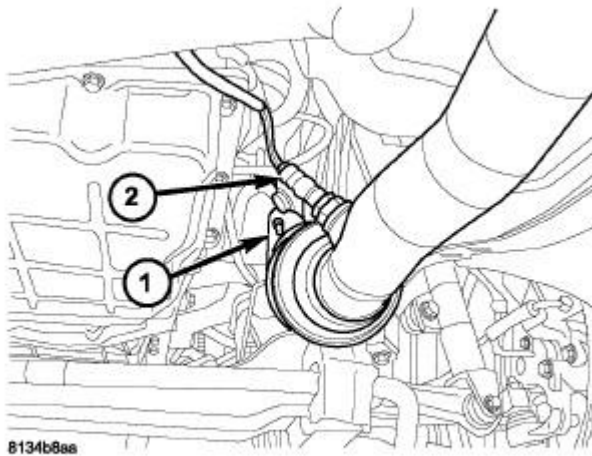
RIGHT EXHAUST PIPE TO MANIFOLD UNION
